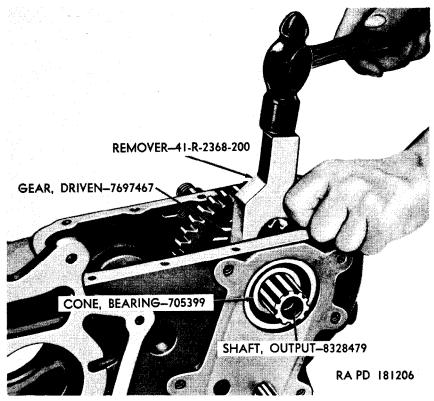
Removing transfer rear axle output shaft inner bearing cone.
